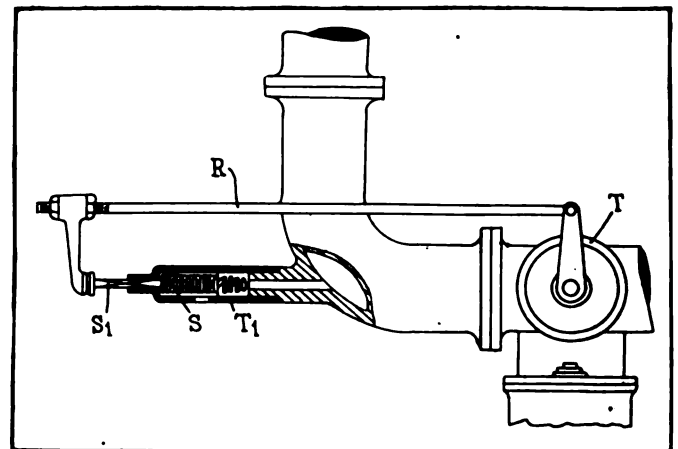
Webb positive-acting auxiliary air supply for gasoline engine carbureters
